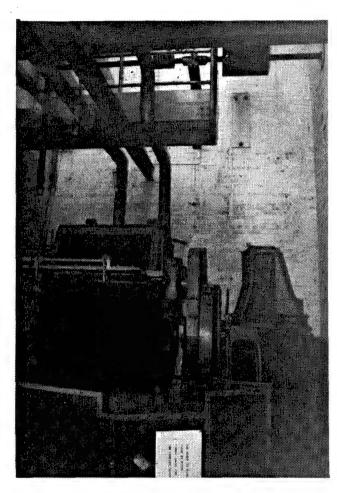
Building 208-2: Baker-Perkins mixer and kneading machine with a 100-gallon capacity.
